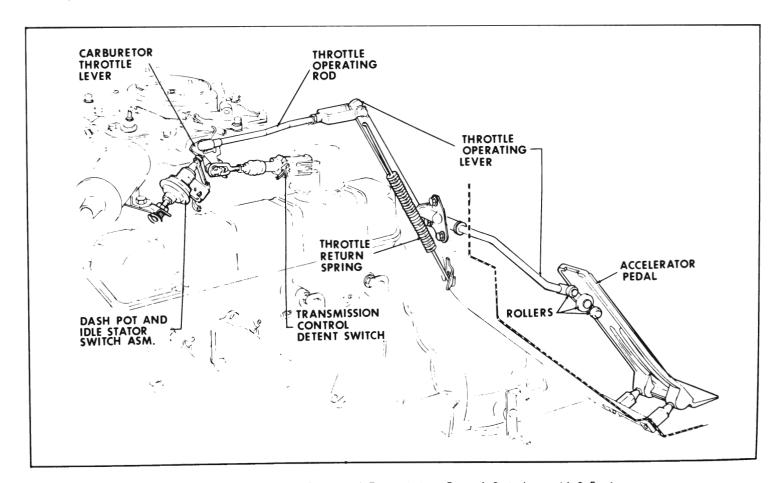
Throttle Linkage and Transmission Control Switches - V-8 Engine
